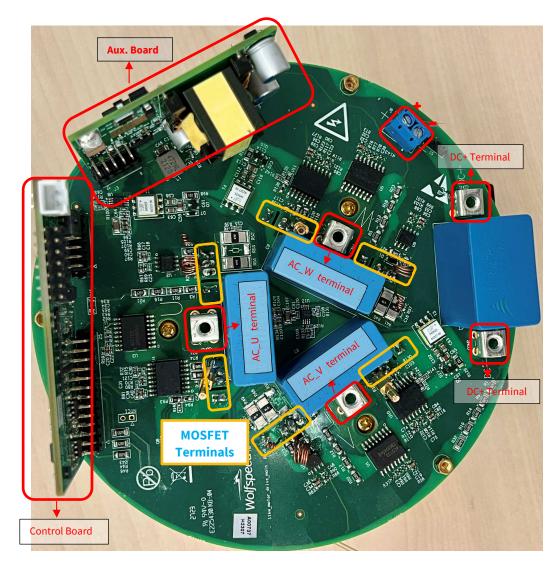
Top View of PCBA (145mm*133mm*60mm)
